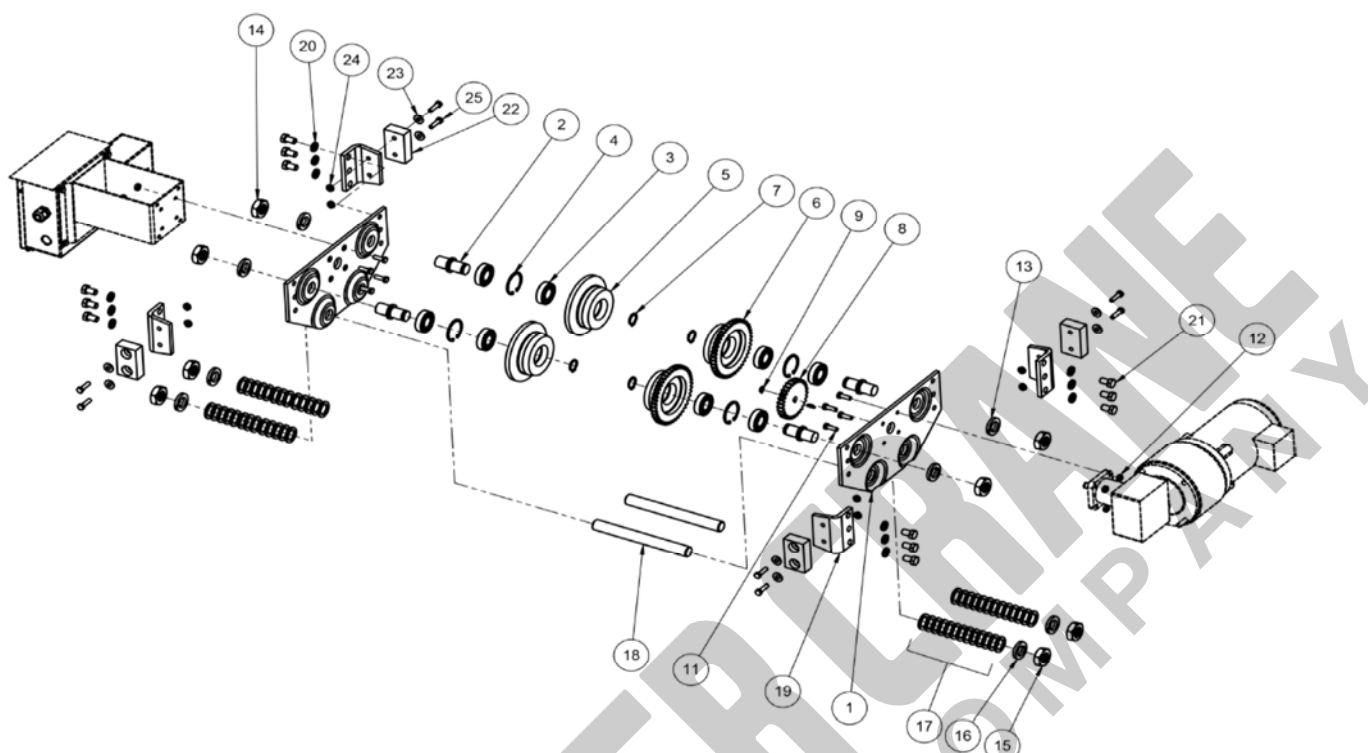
Trolley Frame and Wheel Assembly One Motor 4"0 Wheels (5" c/c Pins)
